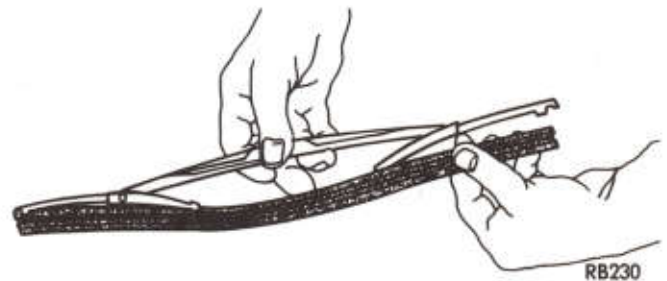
Removing Wiping Element from Blade Assembly Type "B"
